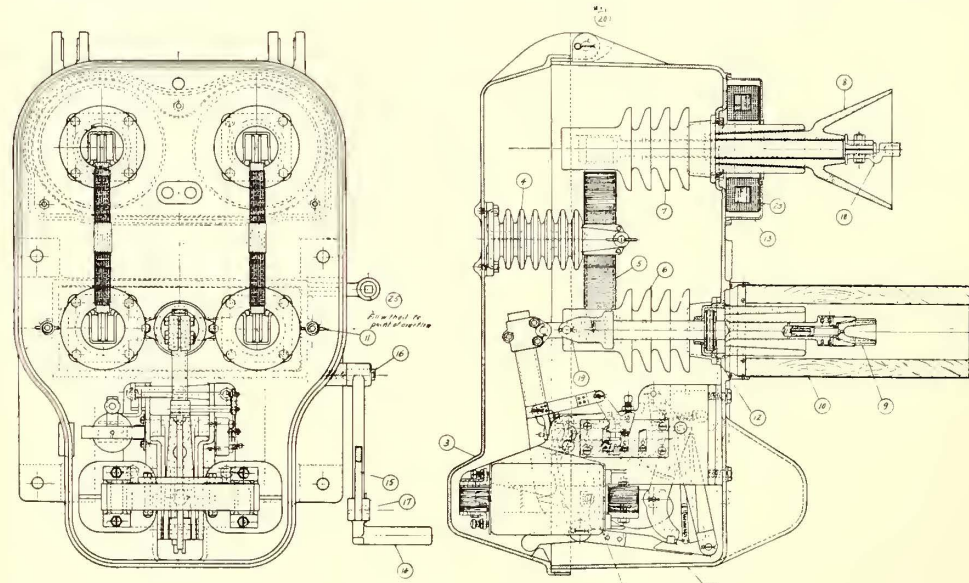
DETAILS OF OIL CIRCUIT BREAKER
